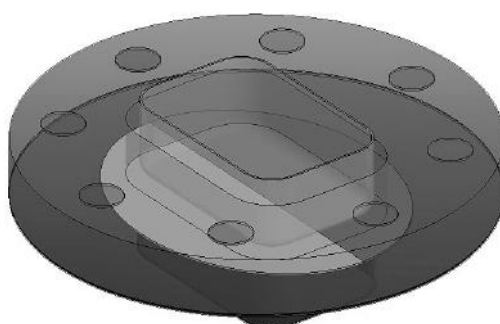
Part of deep-drawing tool with TWB. Fig. 4. Tool model for deep-drawing simulations.
